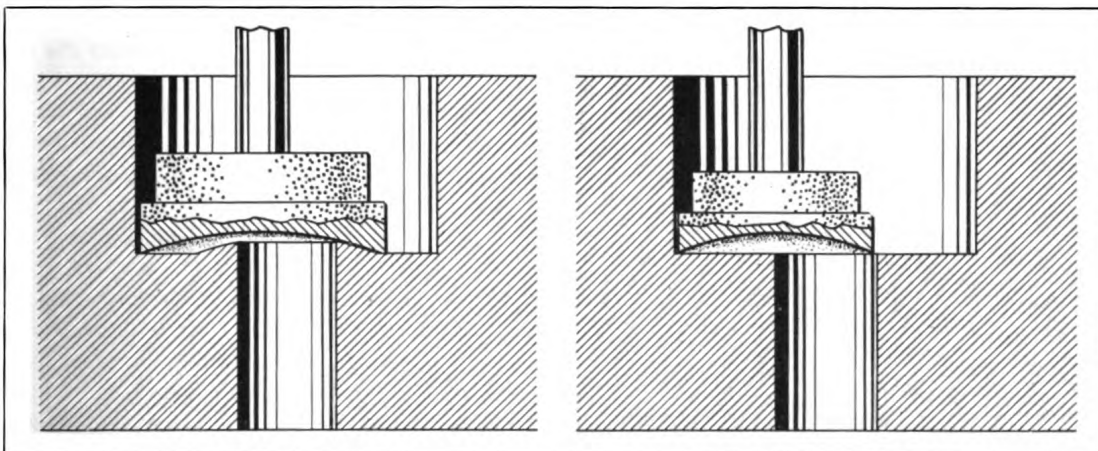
If wheel is too large (left) it will not grind a flat surface. It should be small enough to clear opposite side of hole (right).
